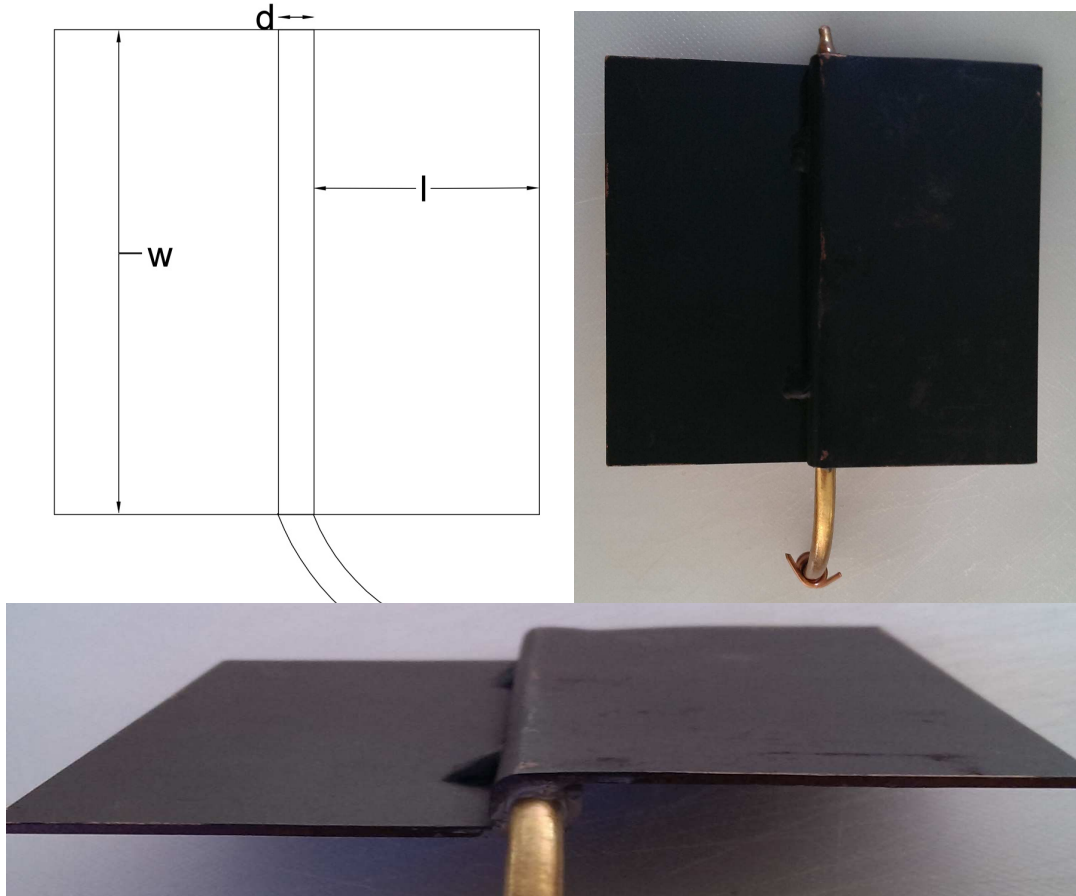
Diagram, top view, and side view of one collector panel with heat pipe.
